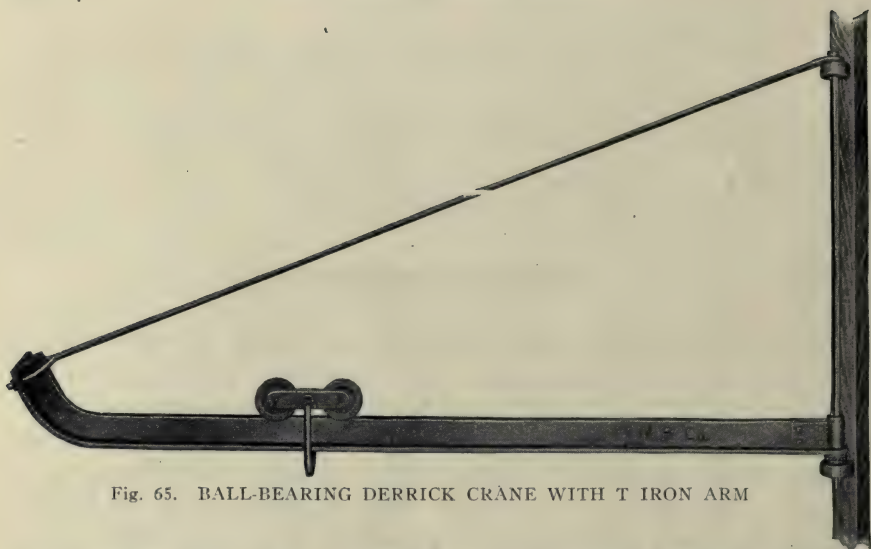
BALL-BEARING DERRICK CRANE WITH T IRON ARM
